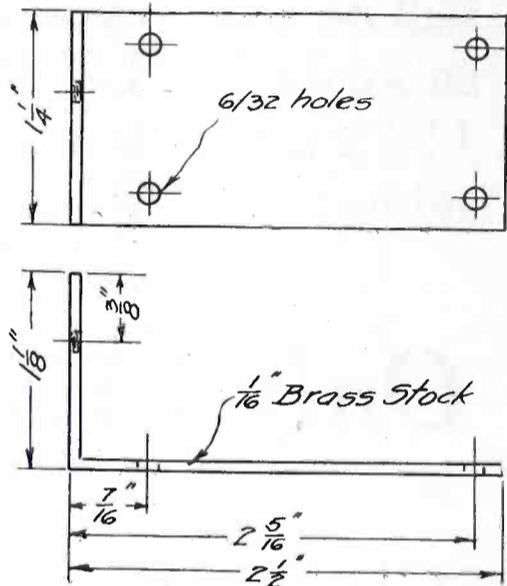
Bracket for Mounting Tube Socket, 1/16 in. Brass Stock
